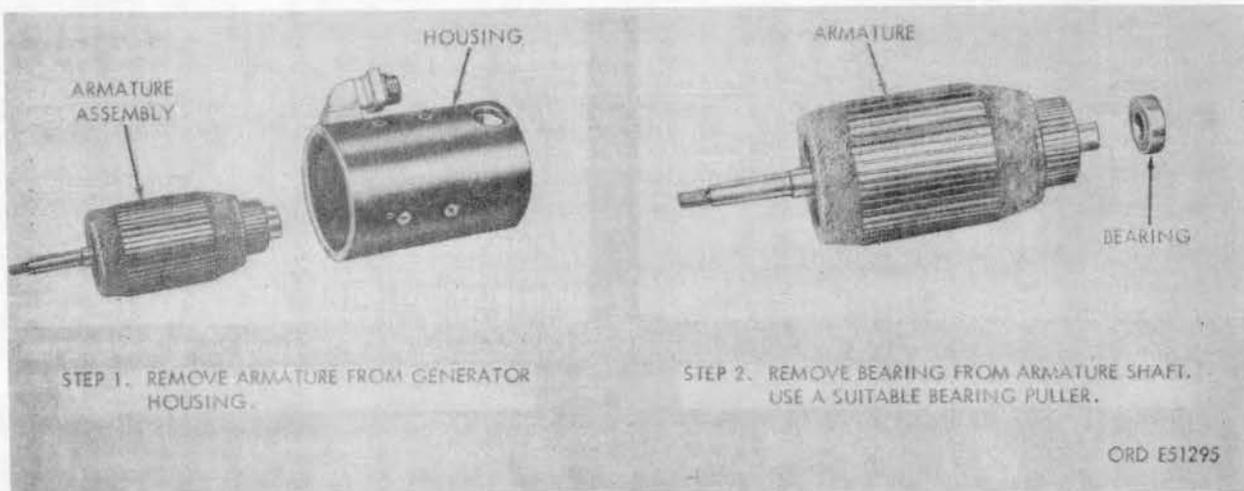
REMOVING AND DISASSEMBLING ARMATURE ASSEMBLY.
